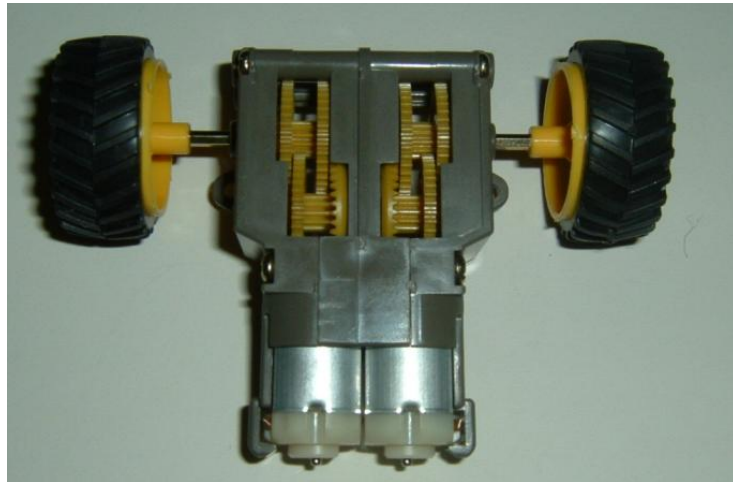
Final Gearbox with Tires Added to Shaft Ends
